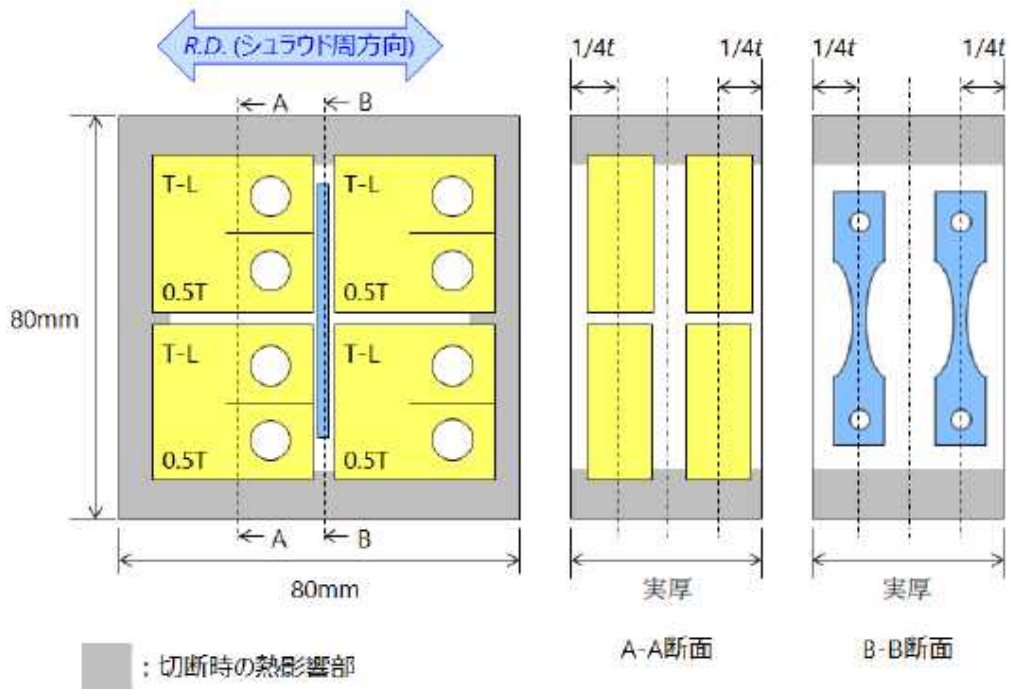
Plans for machining-out test specimens (top guide φ100 mm specimen, 0.5T-C(T))
